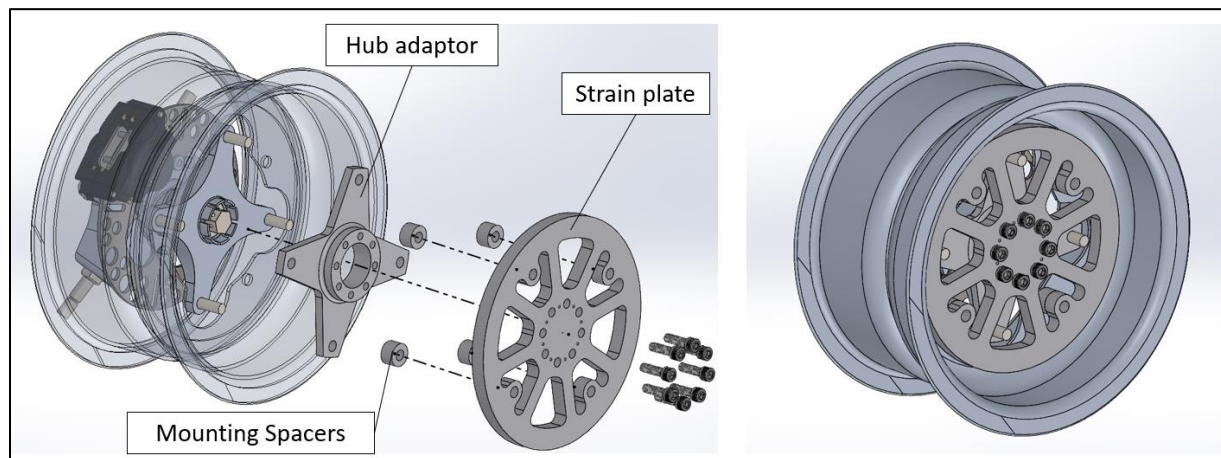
CAD model of a WFT assembly (comprised of a hub adaptor, strain plate, and mounting spacers) assembled onto the McMaster Baja Team's 2024 car's rim.
